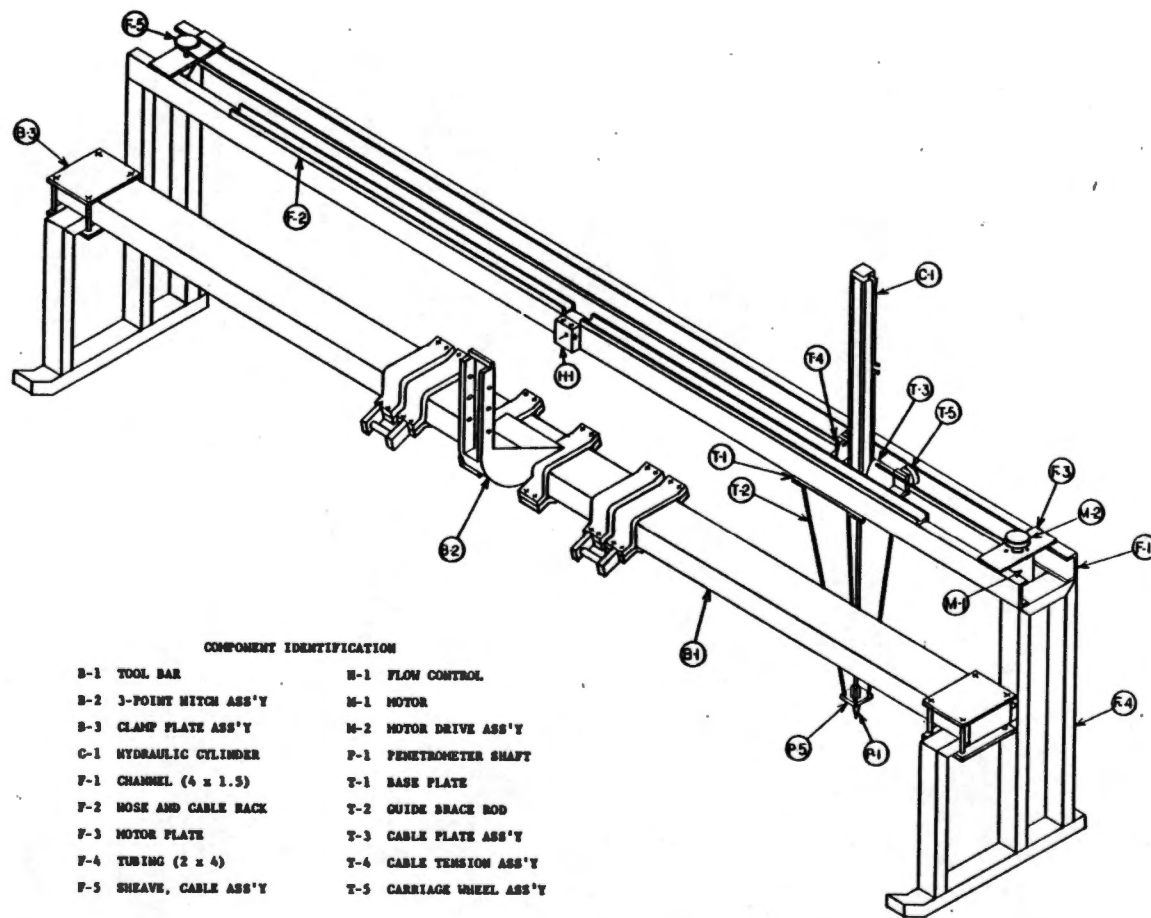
Soil cone penetrometer frame and track including carriage assembly.
